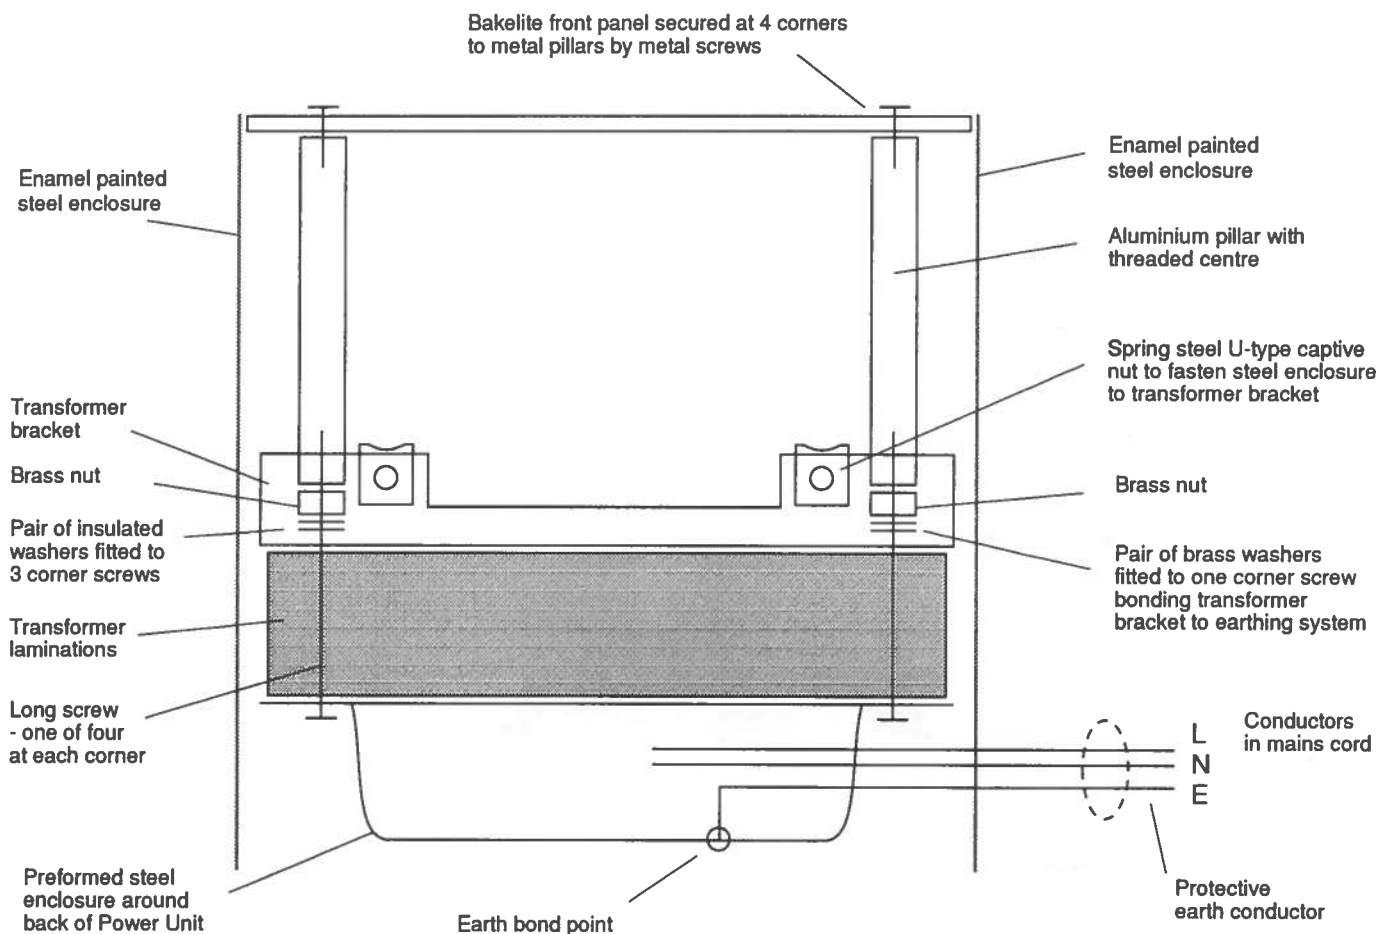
Earthing system on the Unilab Lancashire Power Unit 122.312 (Section - not to scale).
